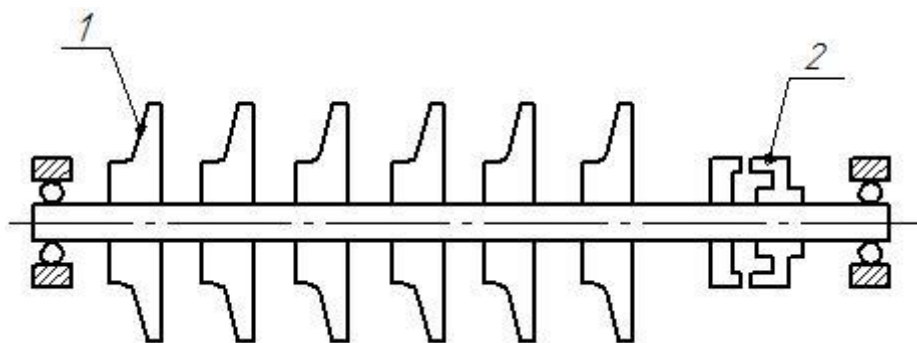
single-suction hydraulic scheme. 1 - impeller; 2 - Handling device (hydraulic balancing device).
